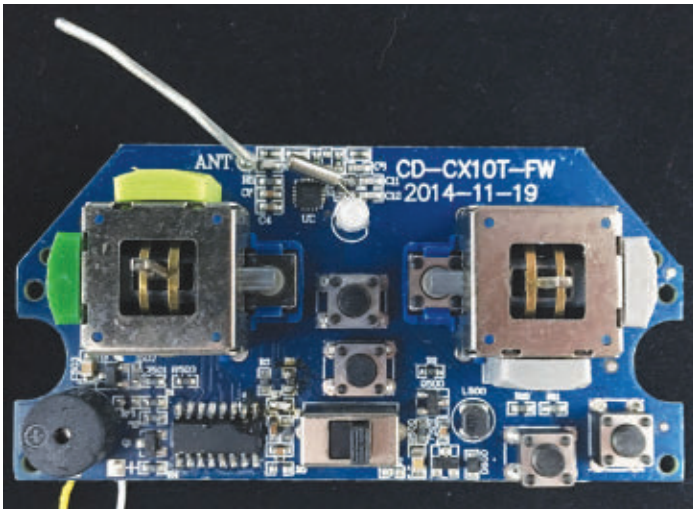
The construction of the controller is relatively simple. Two mechanical joystick assemblies manipulate four potentiometers. The trim and joystick buttons are clearly visible as well.
